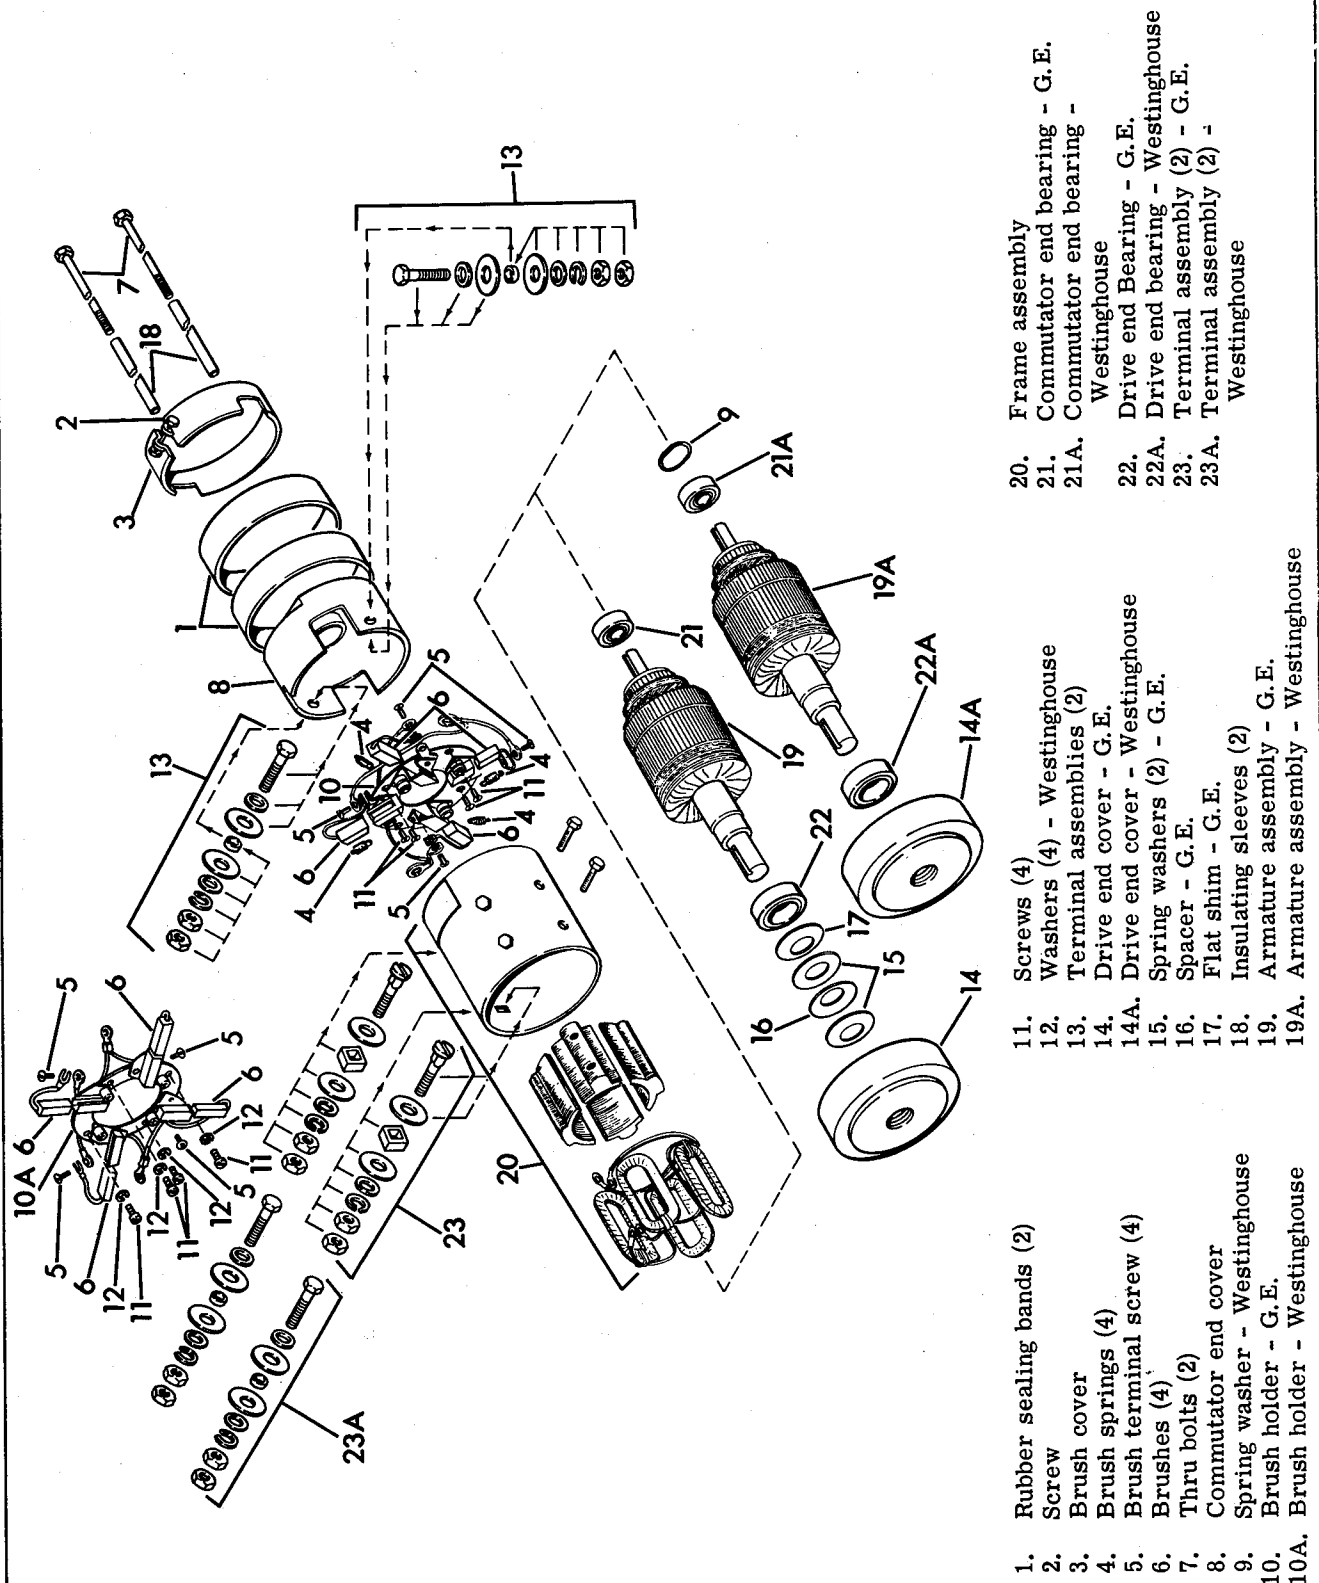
GE and Westinghouse Traction Motors - 1972-1974 DE, DE-4 - Exploded View
